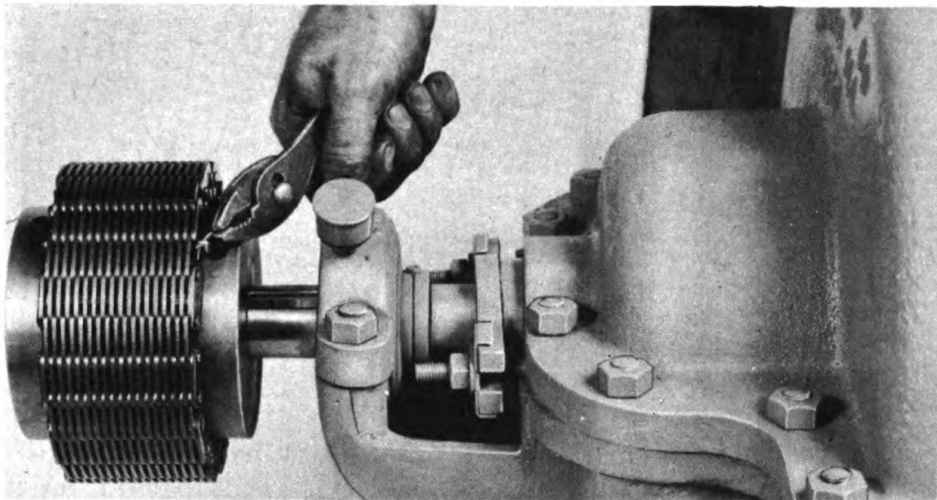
Removing Cotter Pin to Release Coupling Lock Pin
